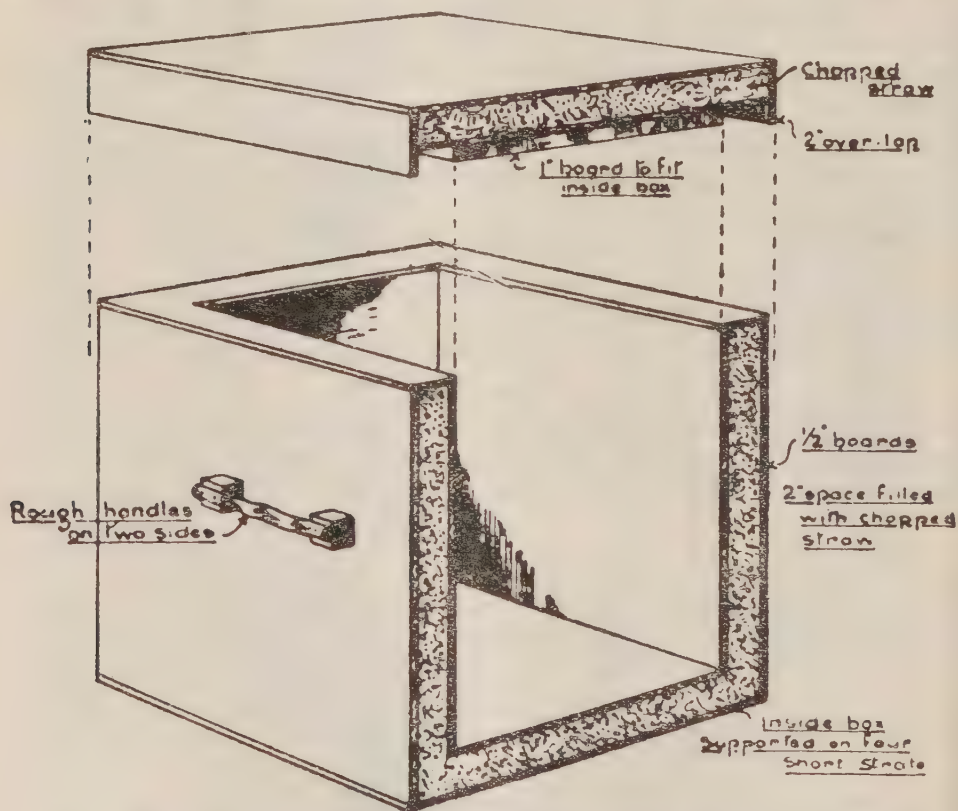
Jacketted Hot Box. One end removed to show construction.
